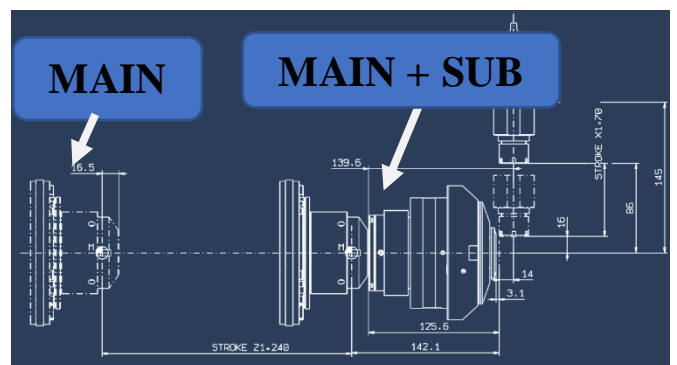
Working space of the DMG Sprint 32/5 linear automat
